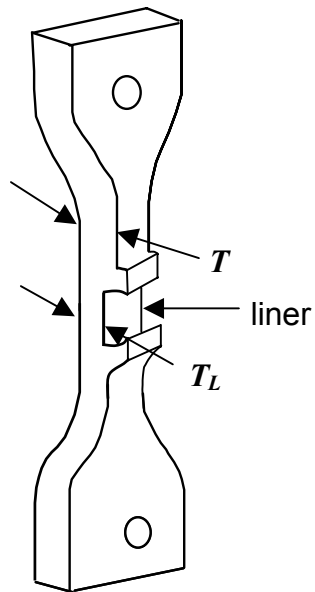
A side-view of a vent hole test specimen with crown part being removed
